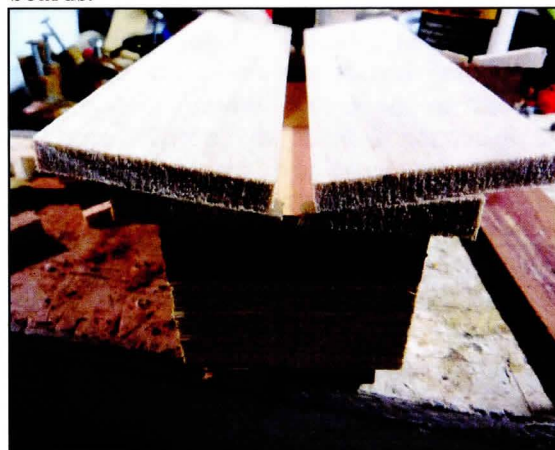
End view of spreading boards glued to the top of Trailing Edge slices which causes boards to have an upward angle.
